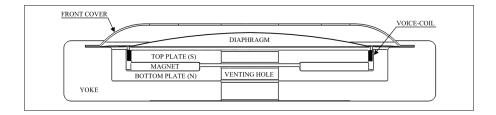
Sectional view of a 8 mm moving-coil micro-loudspeaker with identification of the principal components.
